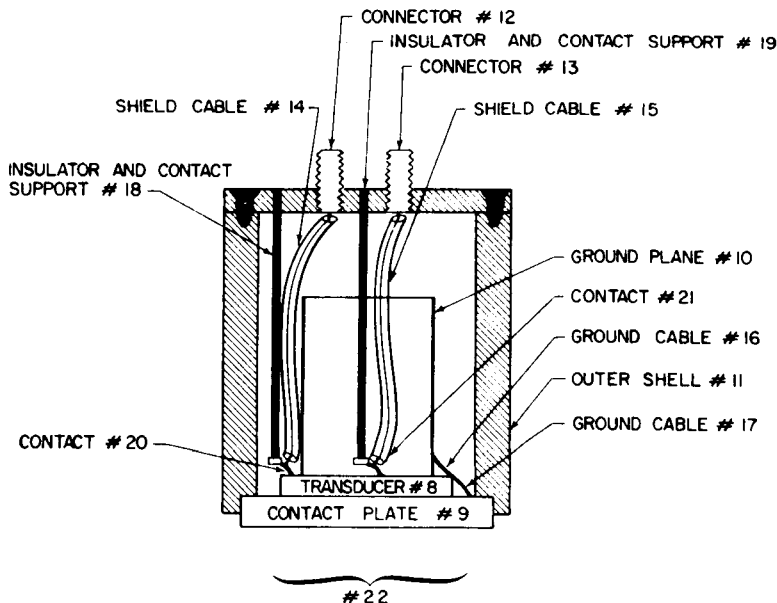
ROUS transducer assembly. The outer shell is magnetic for clamping to steel bolts
